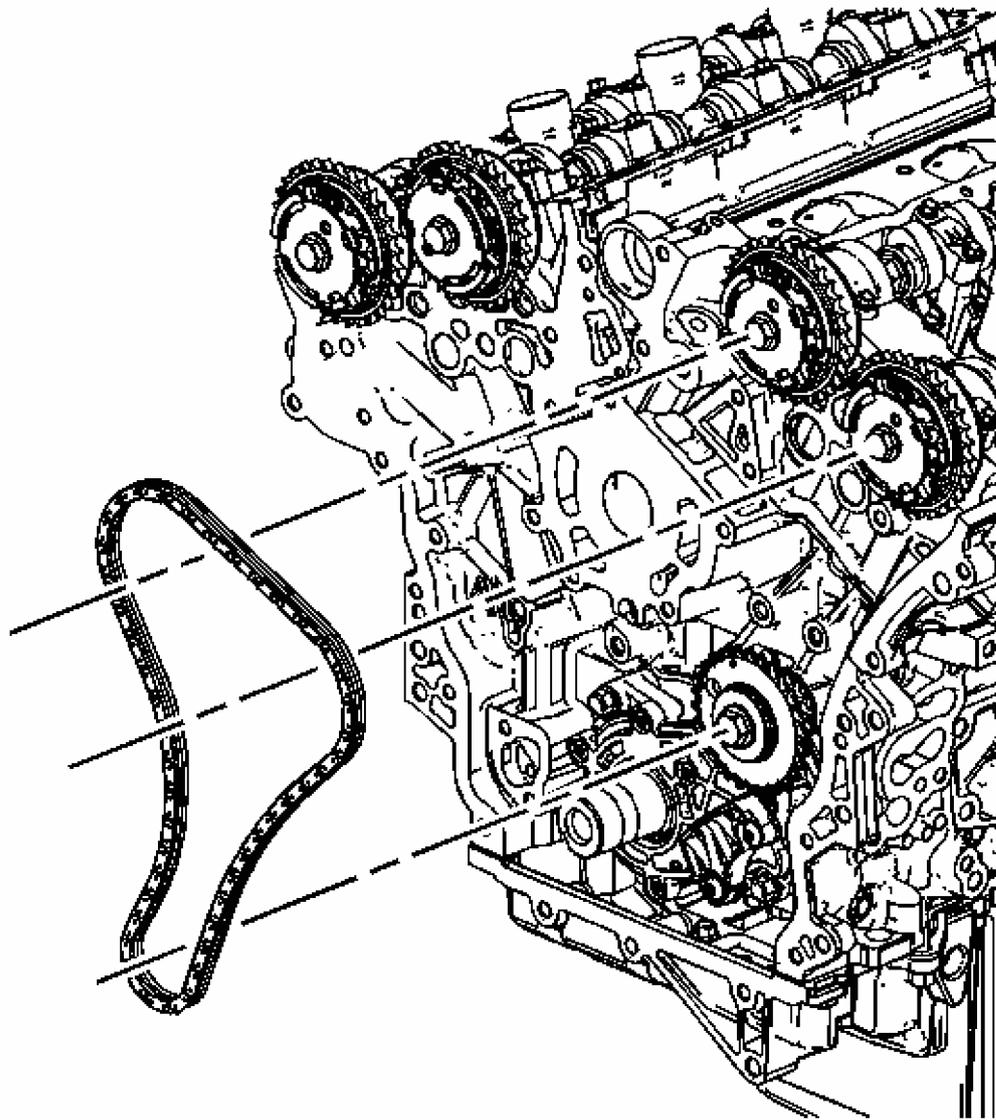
View Of Left Bank Secondary Camshaft Drive Chain
